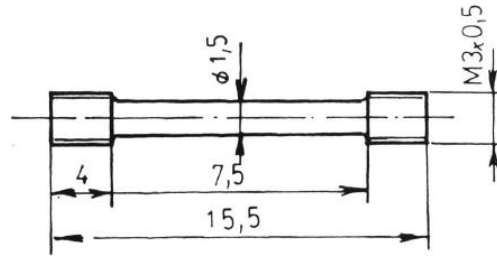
Dimensions of microspecimens taken from heat-affected zone and weld metal samples
